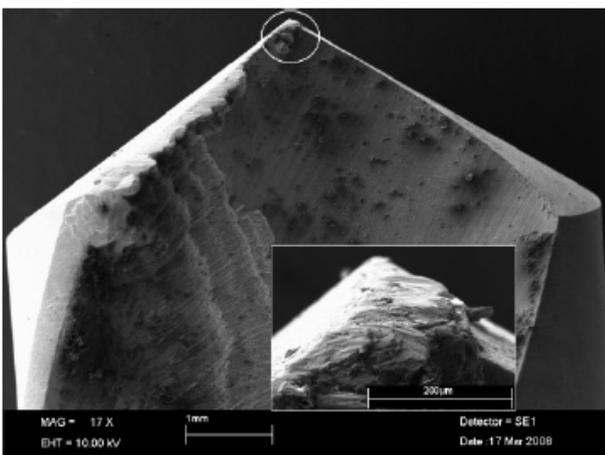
End view of the uncoated drill ($n=800$ rpm, $f=0.10$ mm/rev, 1015 steel, 30 holes)
